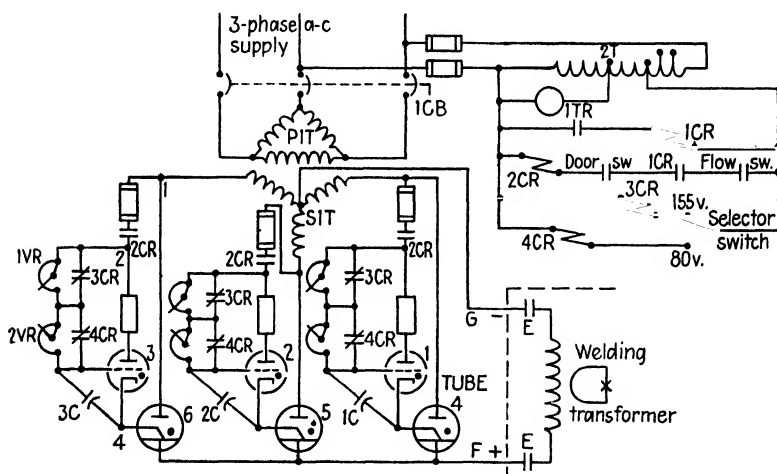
E.—Phase-shifted three-tube rectifier for reactor-storage welding (CR7503-J).
